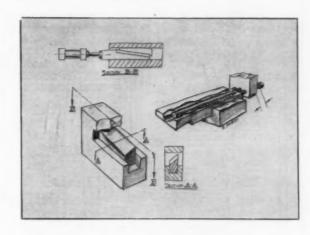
Top Right. Exact clearance for backlash between rod assembly hub and crankshaft is provided with this positive lock-out device.
